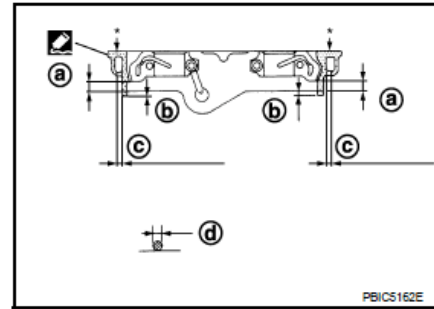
Applying Liquid Gasket To Mating Surface Of Camshaft Bracket
